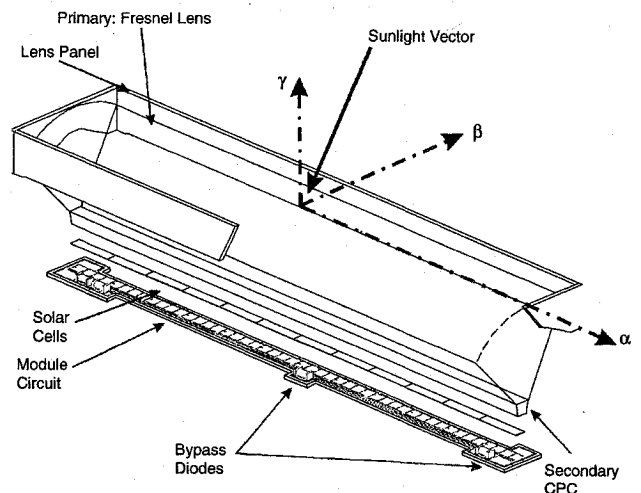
SCARLET module design; drawing of Fresnel optics integrated into module unit.
